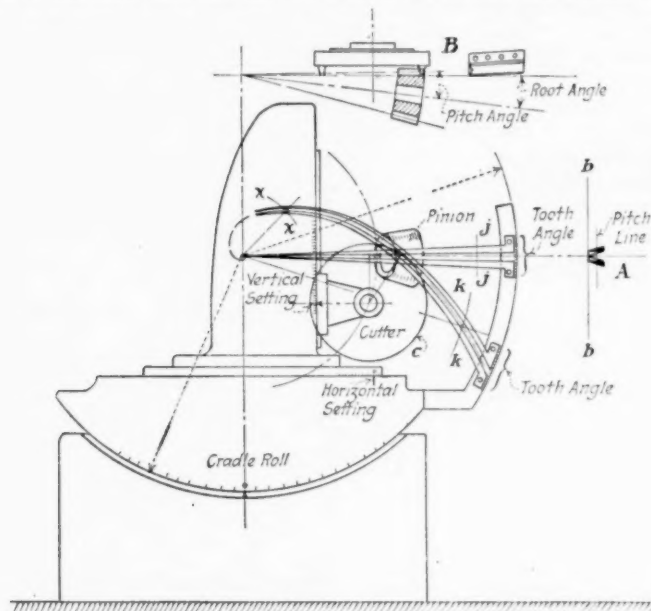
THE GLEASON CRADLE-ROLL GENERATOR AS APPLIED TO THE PRODUCTION OF STRAIGHT-TOOTH AND SPIRAL BEVEL GEARS
